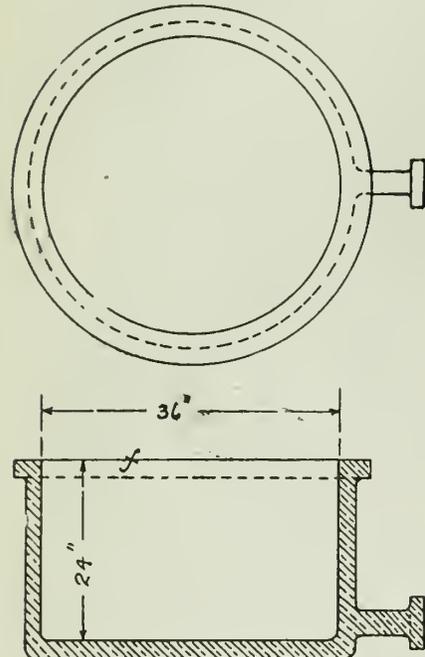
PLAN AND SECTIONAL VIEWS OF WORK.
